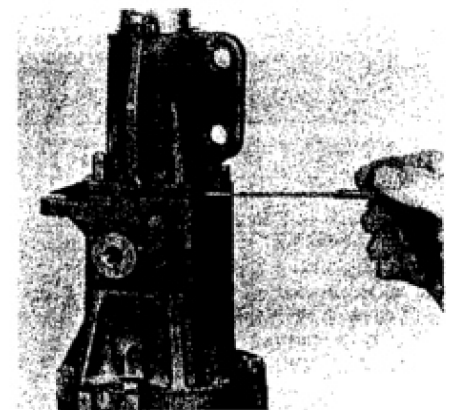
Make sure steering column is bottomed in steering shaft splines, then measure clearance for upper shim pack as shown. Install shims equal to measured clearance PLUS 0.005.
